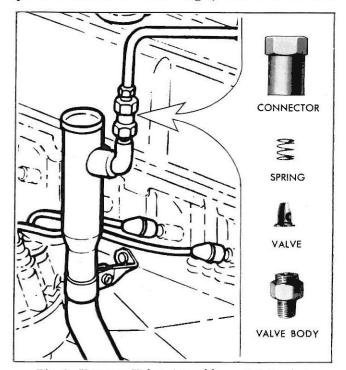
Vacuum Valve Assembly on L-6 Engines
